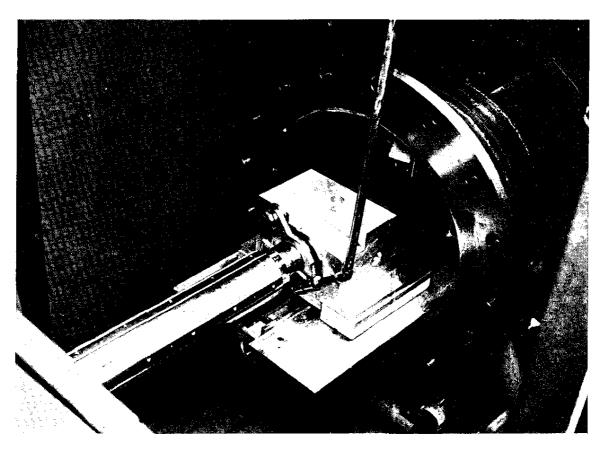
METHOD FOR ROTATING AND CLAMPING THE MANDREL
